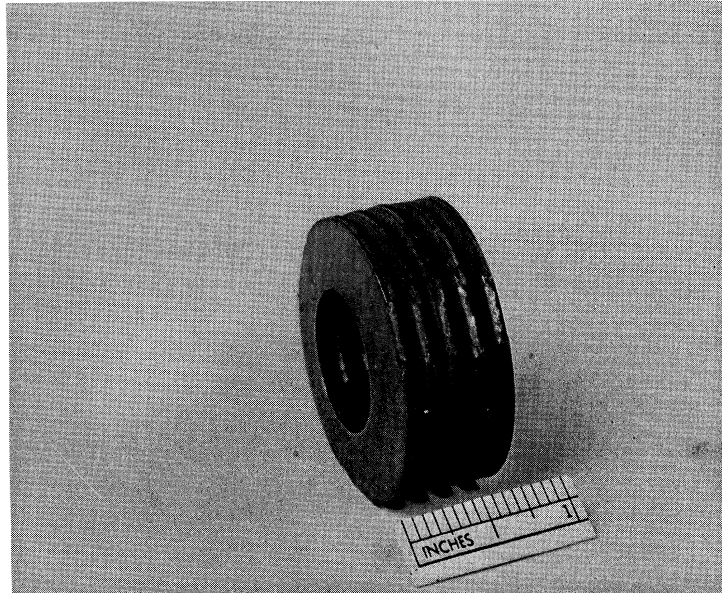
Belleville spring washers stacked by means of welding.
